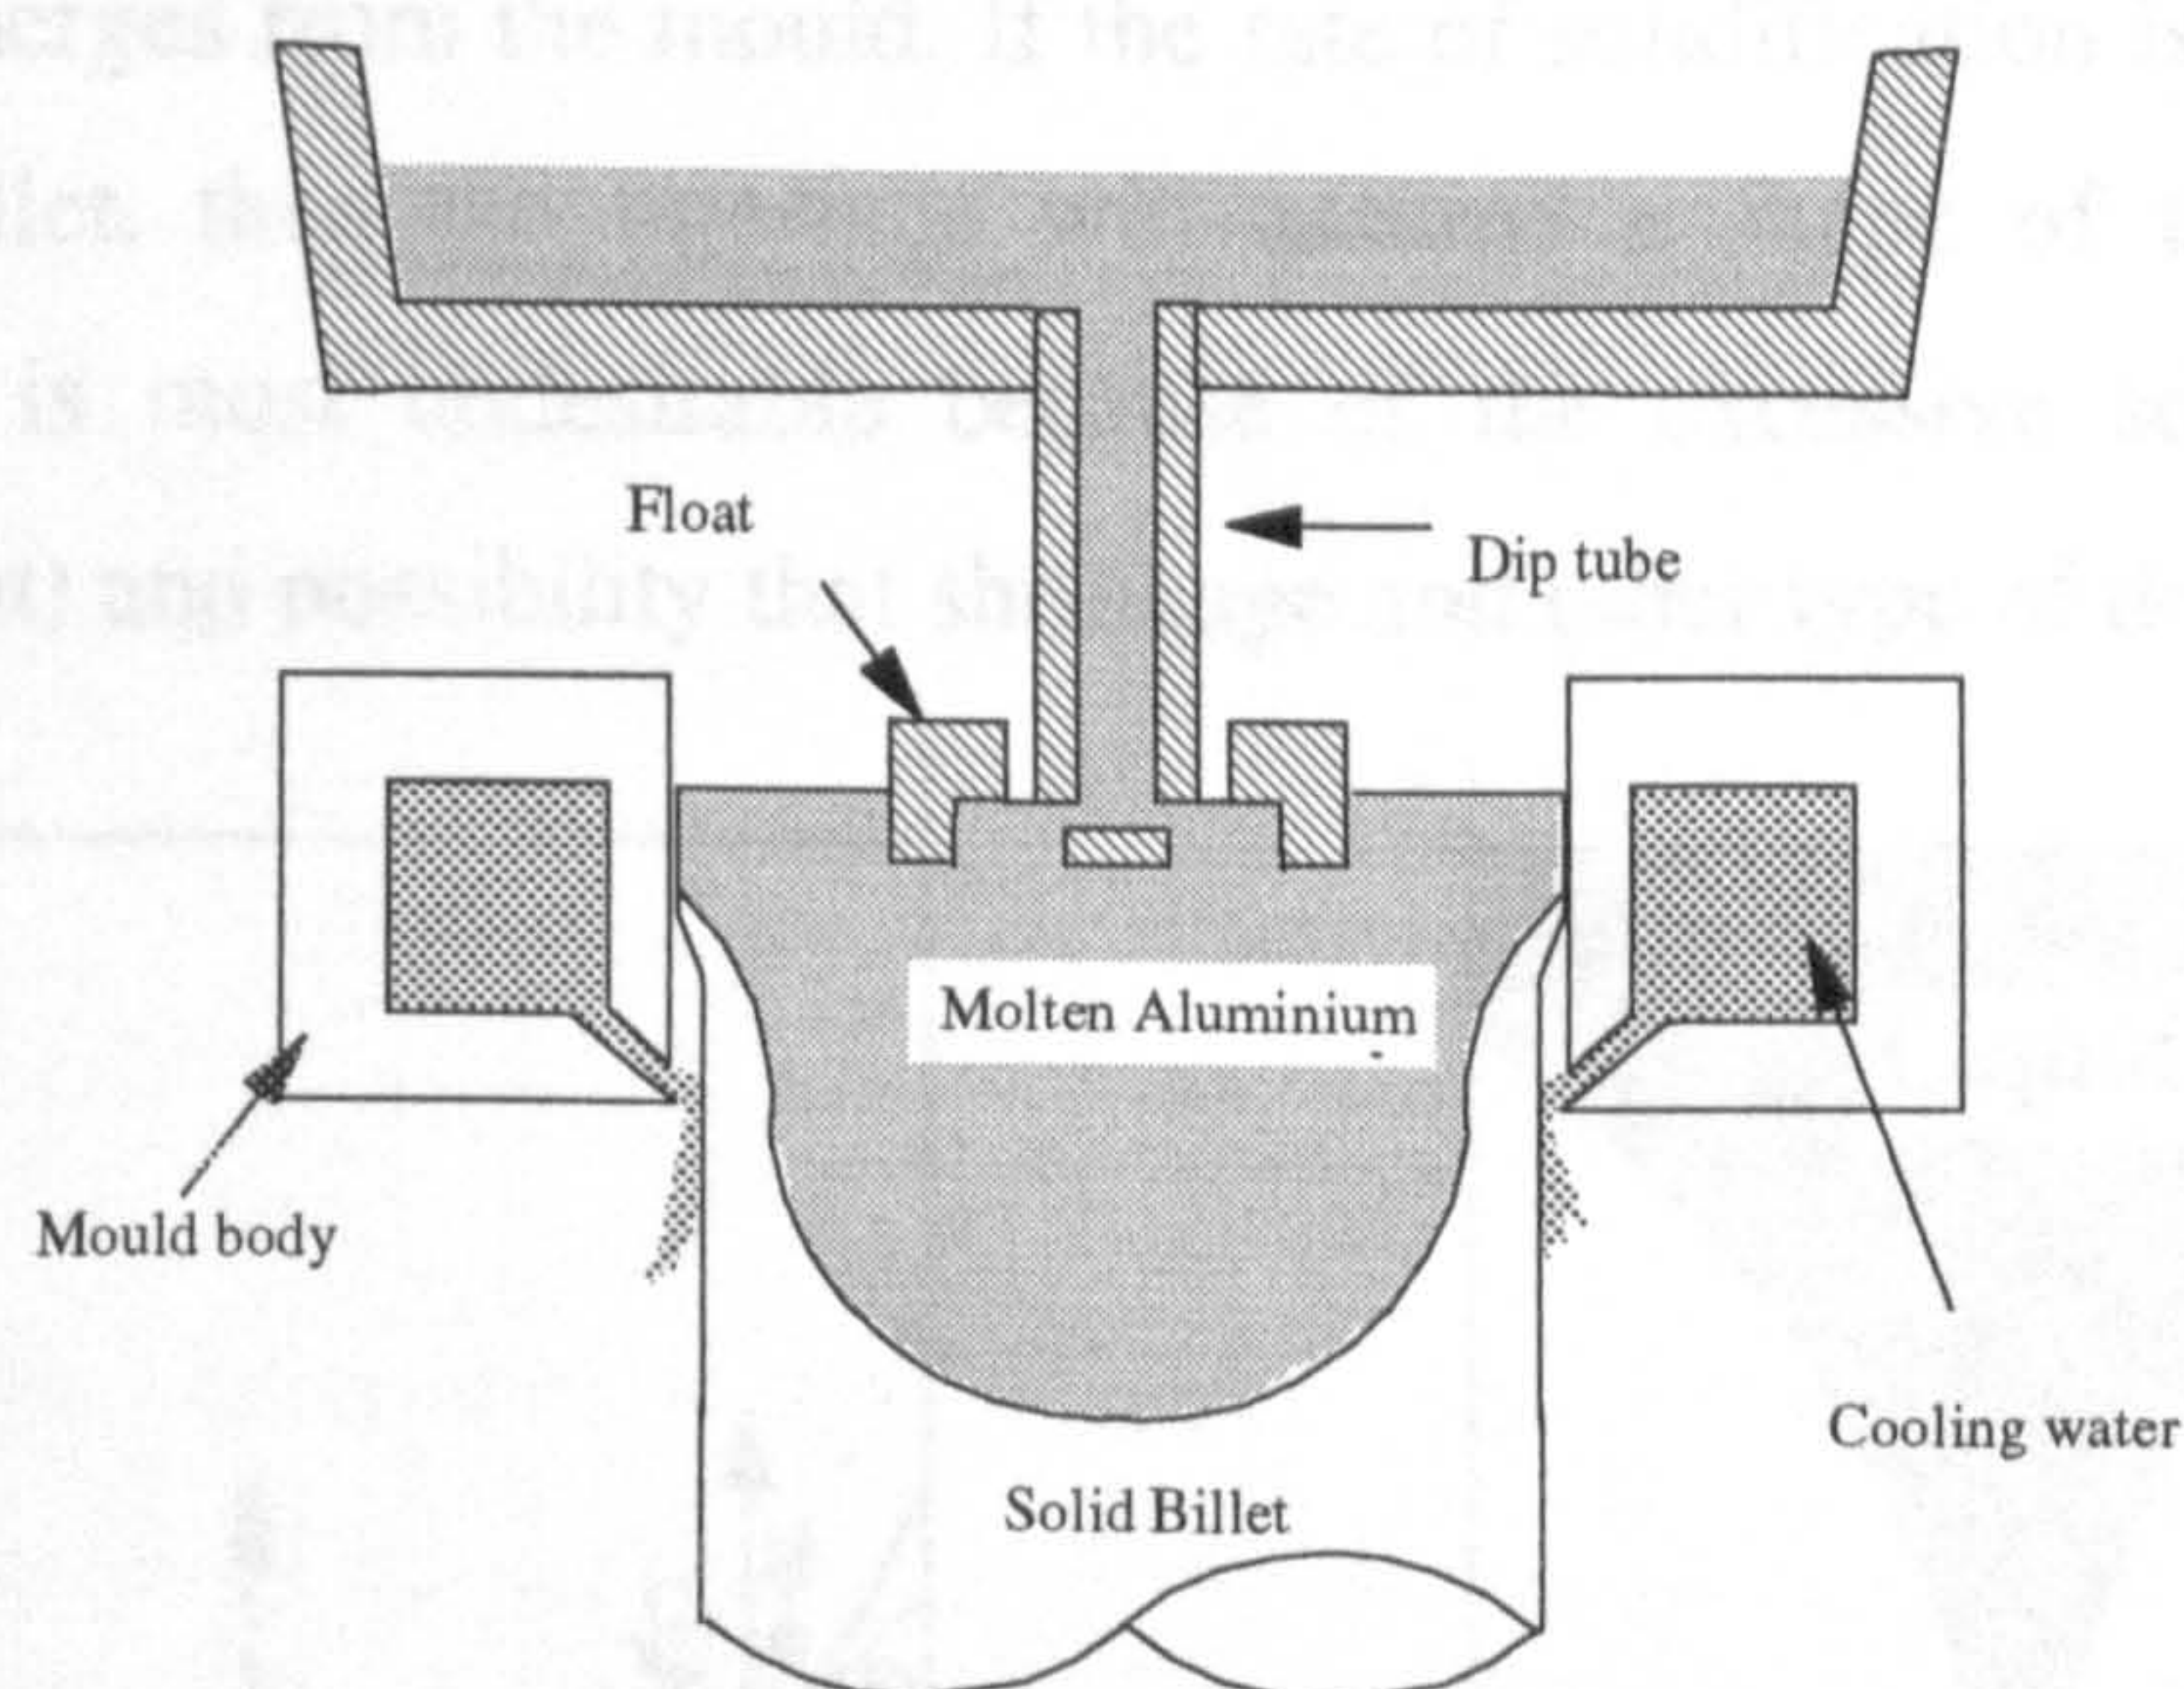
Direct chill casting of aluminium extrusion ingot.
